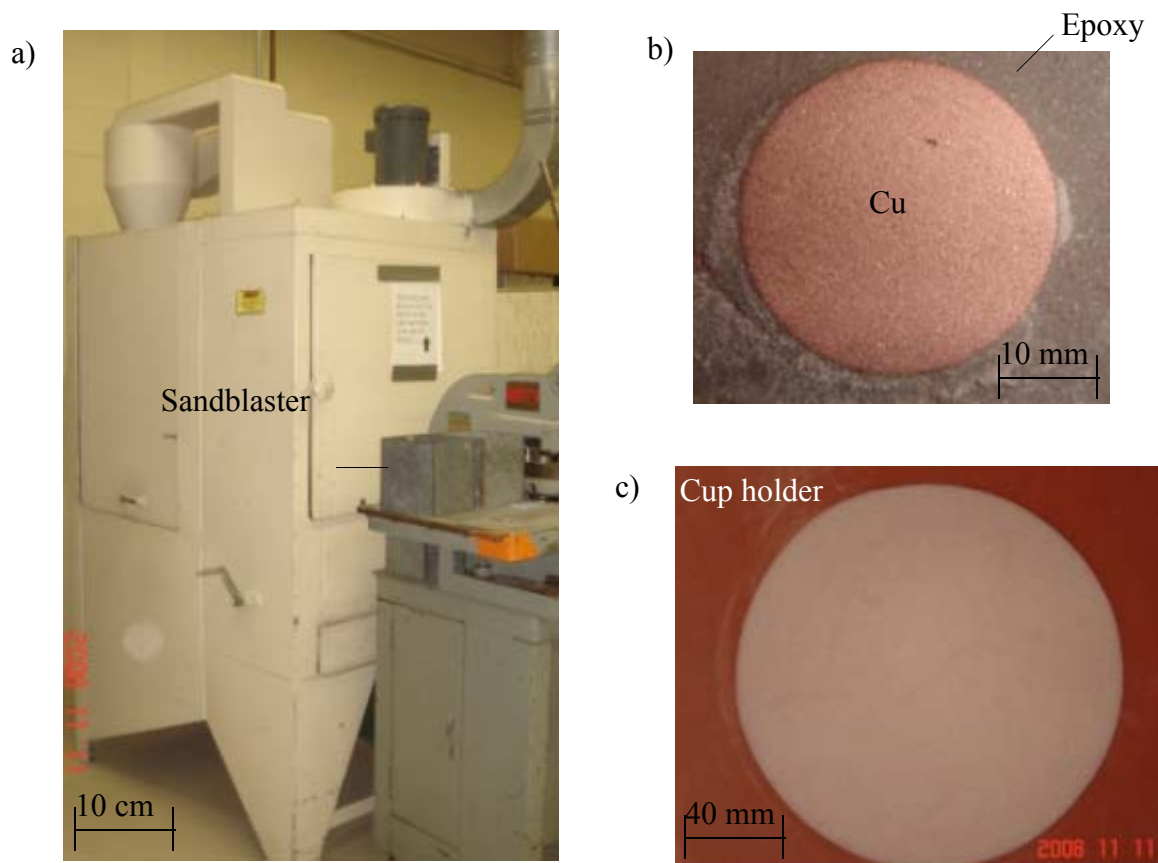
Overview of sandblasting a) machine, b) sample, and c) fine bead.
